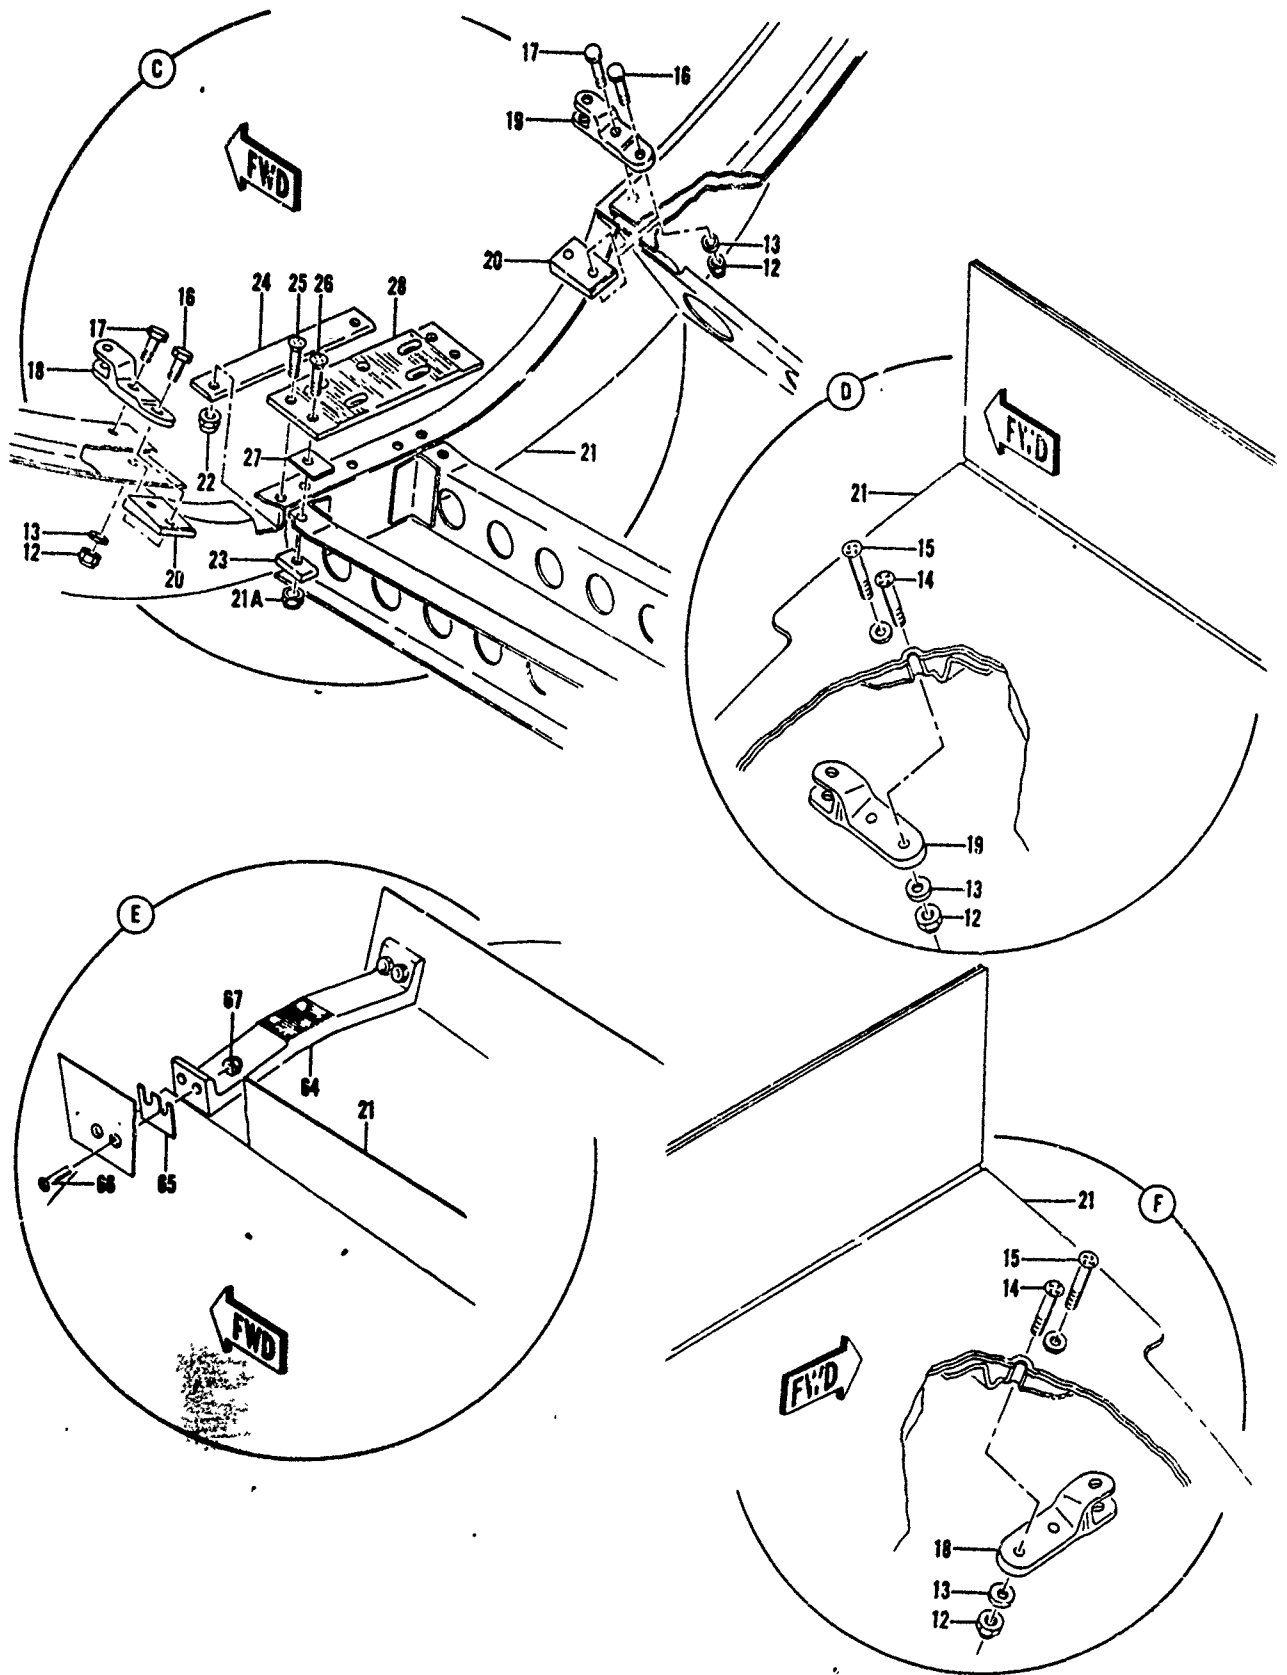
Aft Thrust Reverser and Sleeve Assembly (Sheet 2 of 3)
